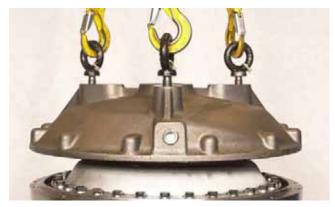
Remove converter housing front cover with three (3) standard eye bolts 3/4 UNC attached to a chain.
